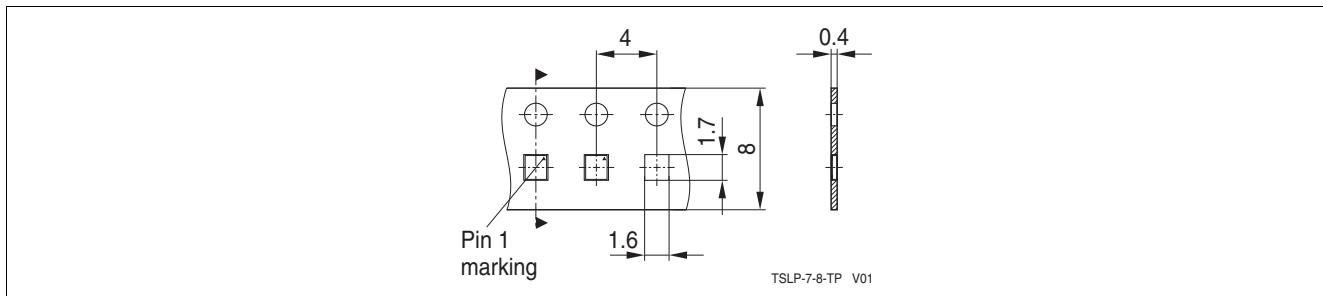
Tape & Reel Dimensions ( $\varnothing$  reel 180 mm, pieces/reel 7500)
